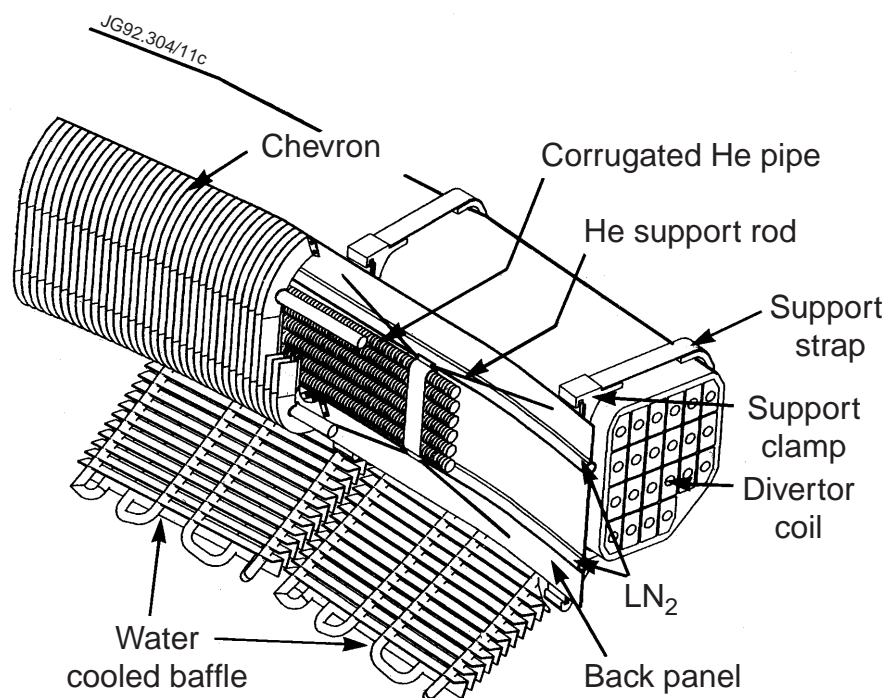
A Three Dimensional View of the JET Divertor Cryopump.
